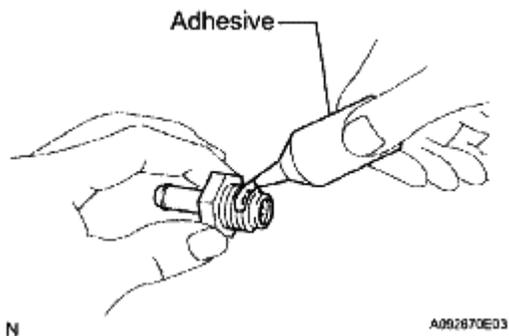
Applying Adhesive To Threads Of Ventilation Valve
